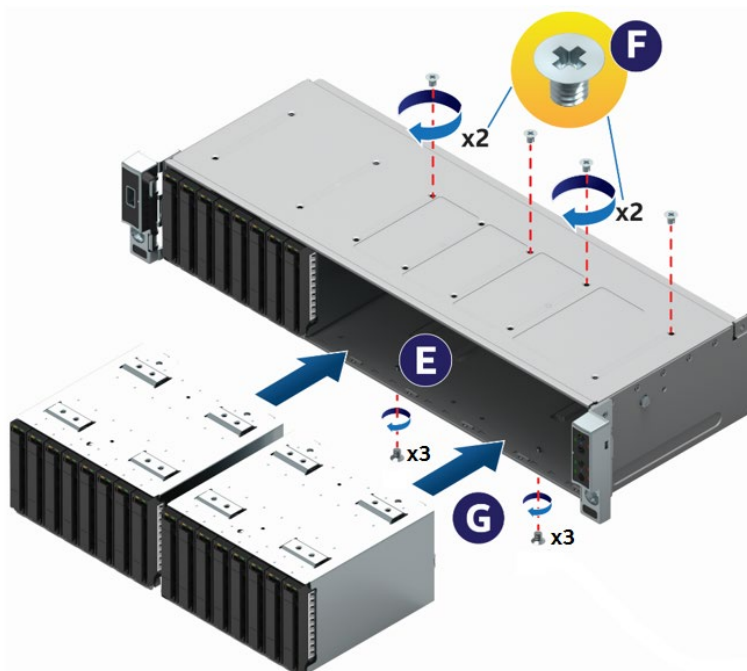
Installing the 8 x 2.5” Drive Bay Module(s)
